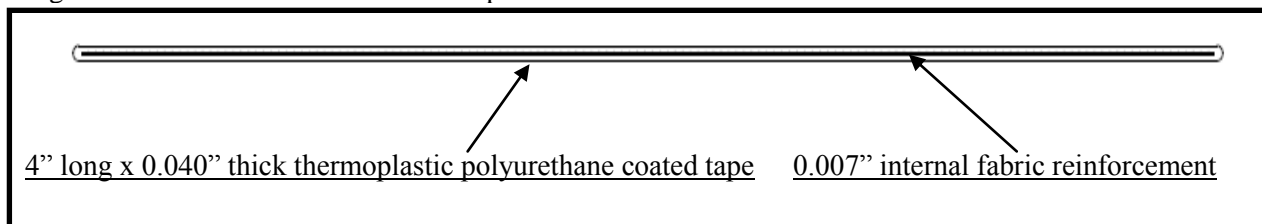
1" Reinforced Sealed Tape Cross-Sectional View
